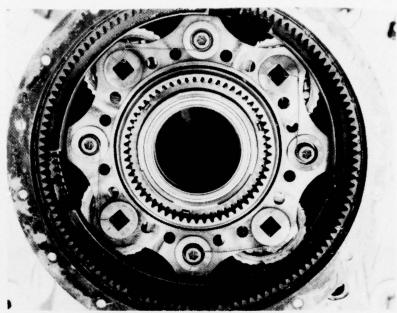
View looking into ring gear case showing lower oil collectors after 54-minute loss-of-lube test of optimized transmission configuration number 2.
